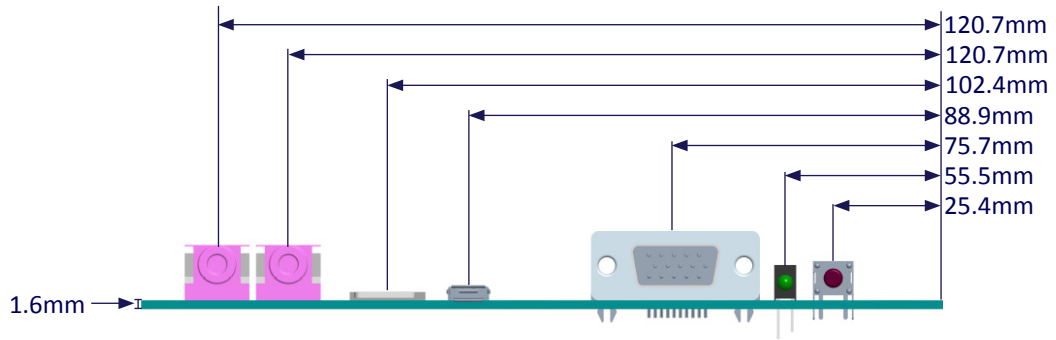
External I/O dimensions of the VIA VAB-3000 board (front panel)
